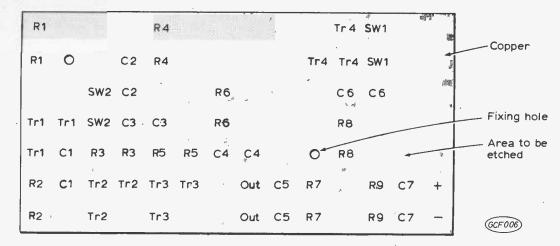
The dotted areas of Fig. 1 are transferred to the paper master as shown here, the final layout depending upon the sizes of the components to be used. The copper will be on the other side of the board, which is shown here twice final size.
